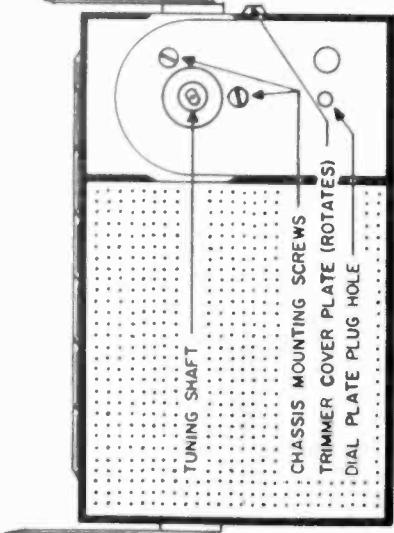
FRONT VIEW - DIAL PLATE REMOVED
